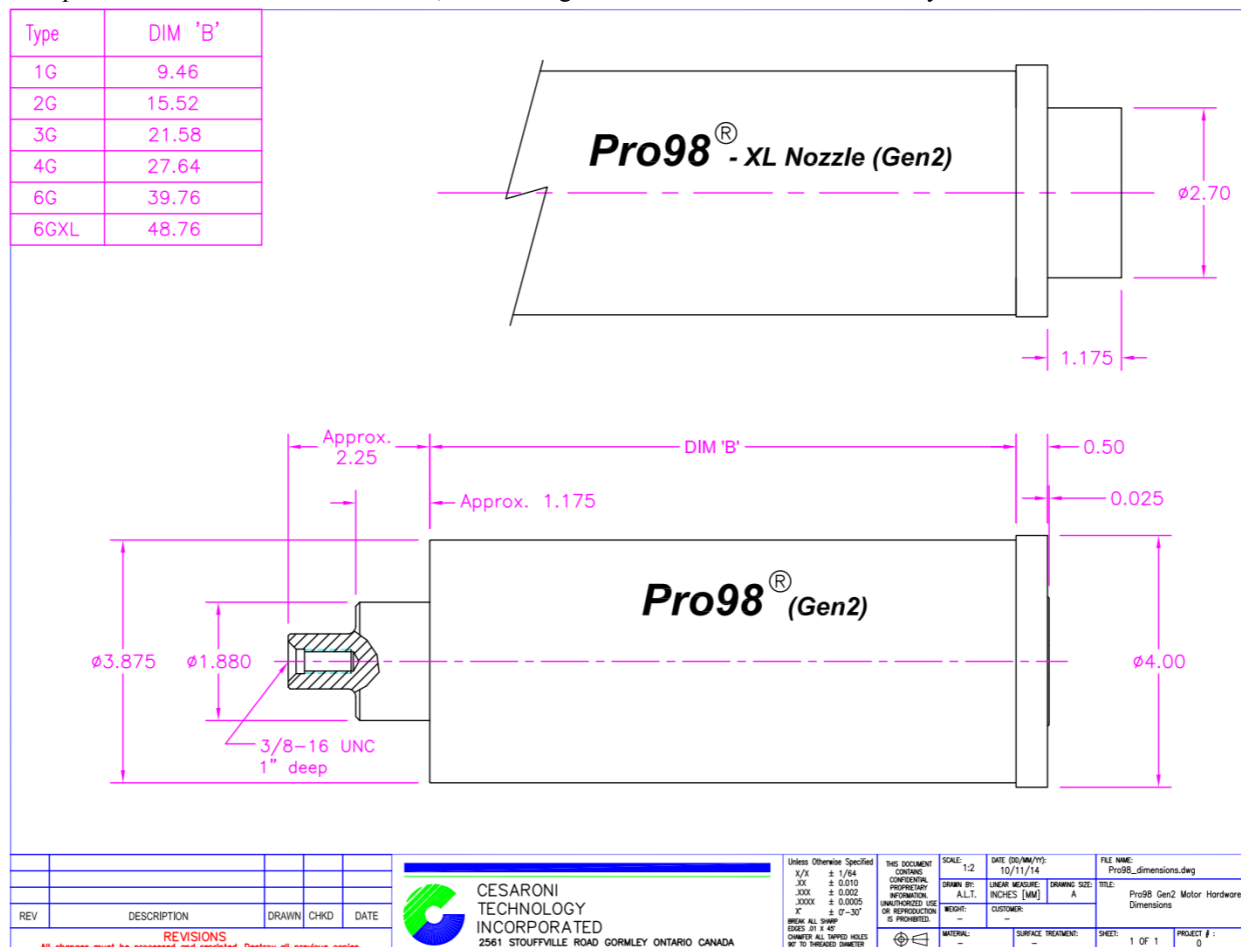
Engineering drawing of CTI PRO 98 6G engine casing and closures
